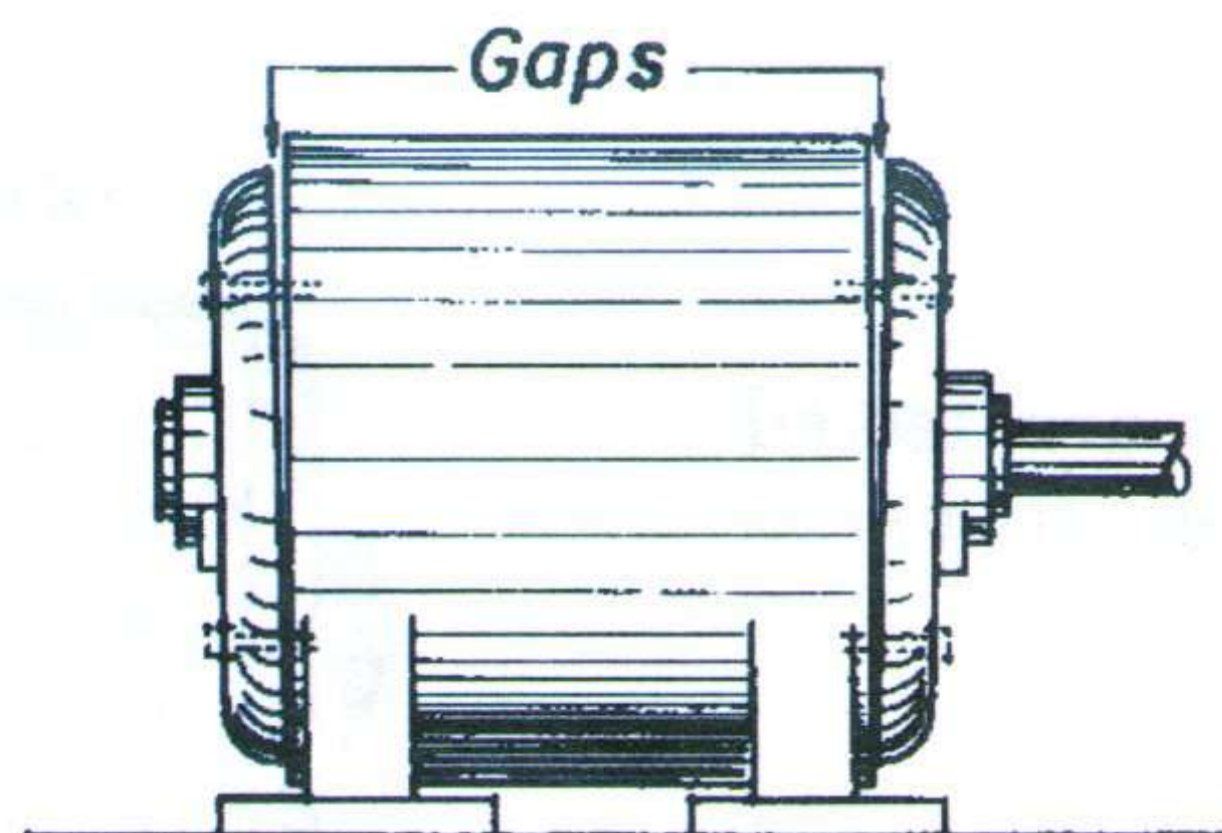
A motor showing end plates not mounted properly. This prevents the rotor from turning. Use a mallet to tap plates into position.
